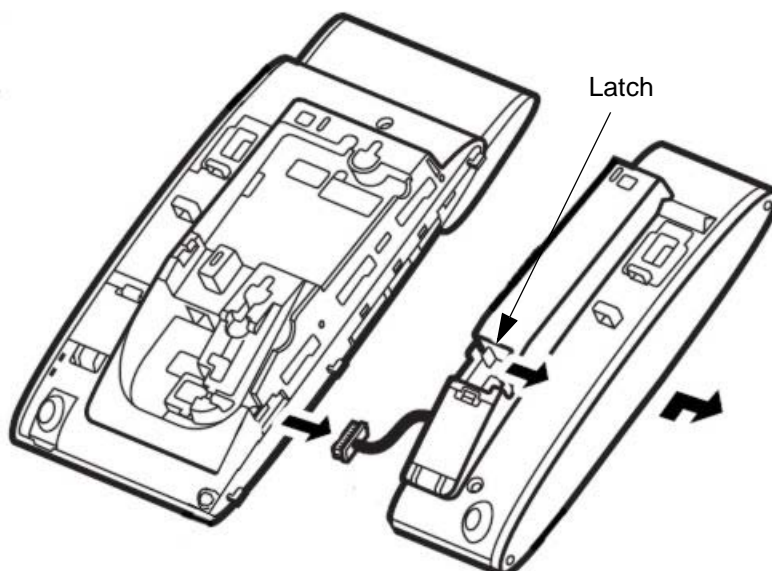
Bottom of Multiline Terminal (Legs Removed)
